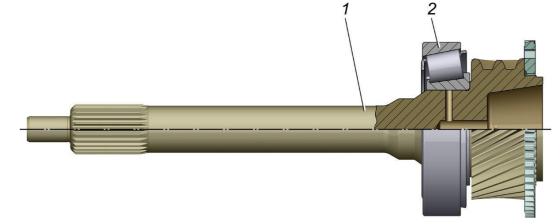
Primary shaft assembly: 1 – primary shaft; 2 – roller bearing
